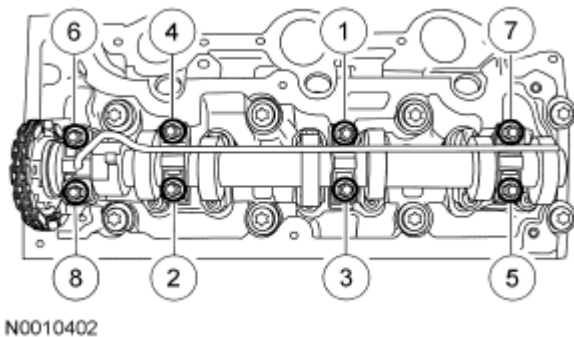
Identifying Oil Supply Tube Bolts Removing Sequence
